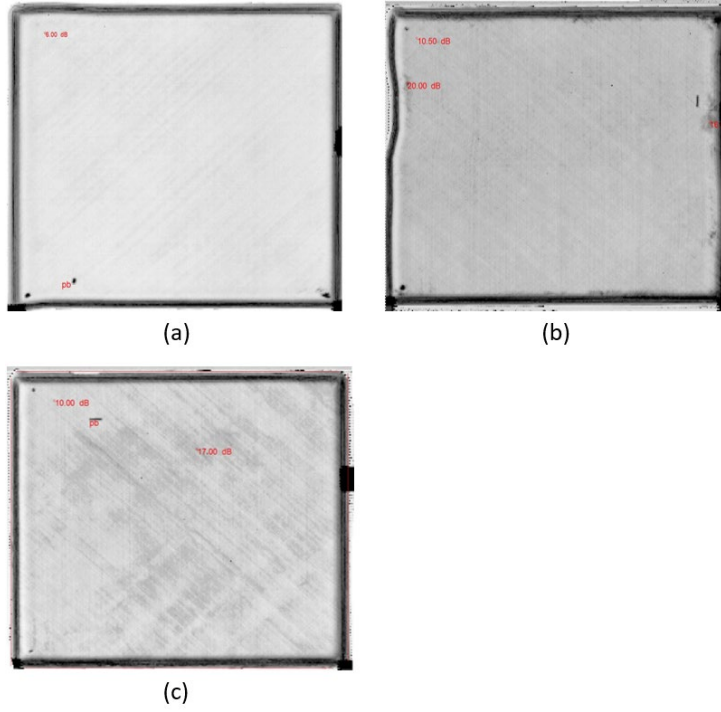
NDI of flat panel geometry (a) 017-1-1, (b) 017-1-2, (c) 017-1-3
